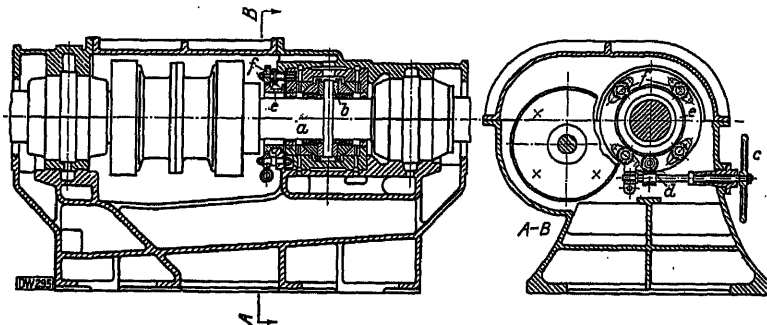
Parsons, Michell* thrust block with gear for adjusting the axial blade clearance
